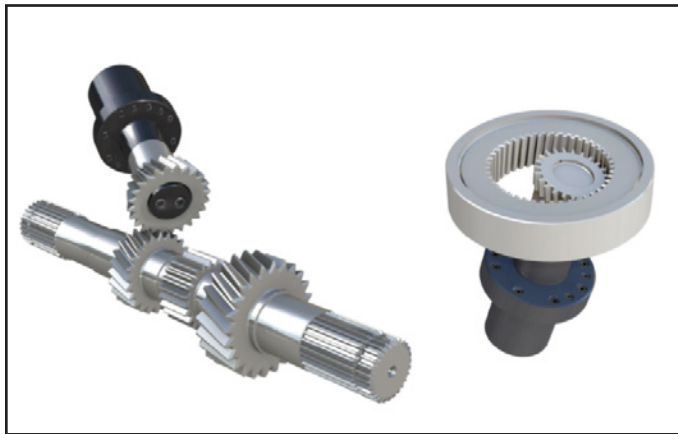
Gear skiving of internal and external gears with a relation of tool and workpiece axis arranged at an angle to each other.
